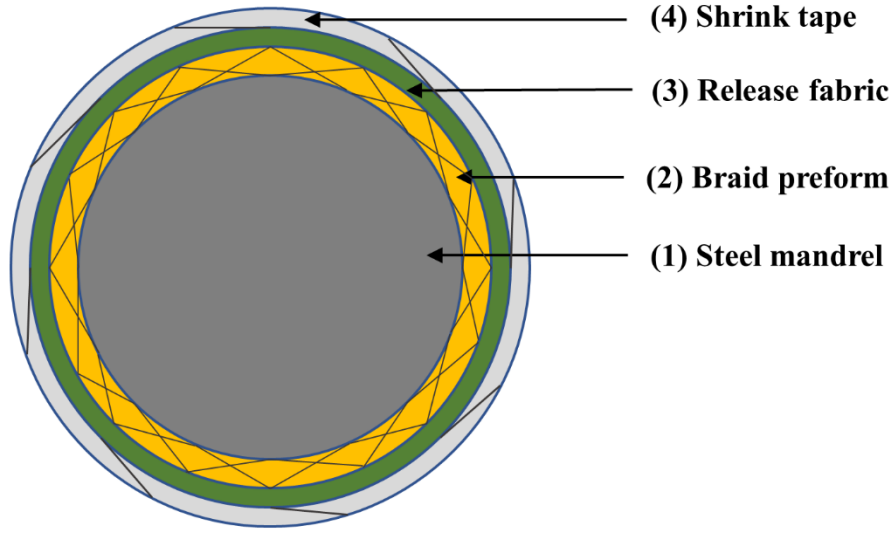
Schematic illustration of the manufacturing process. Steps of manufacturing are: 1) coating steel mandrel with mold release. 2) overlaying preform on the mandrel and impregnating it. 3) applying release fabric. 4) wrapping the shrink tape over the braid.
